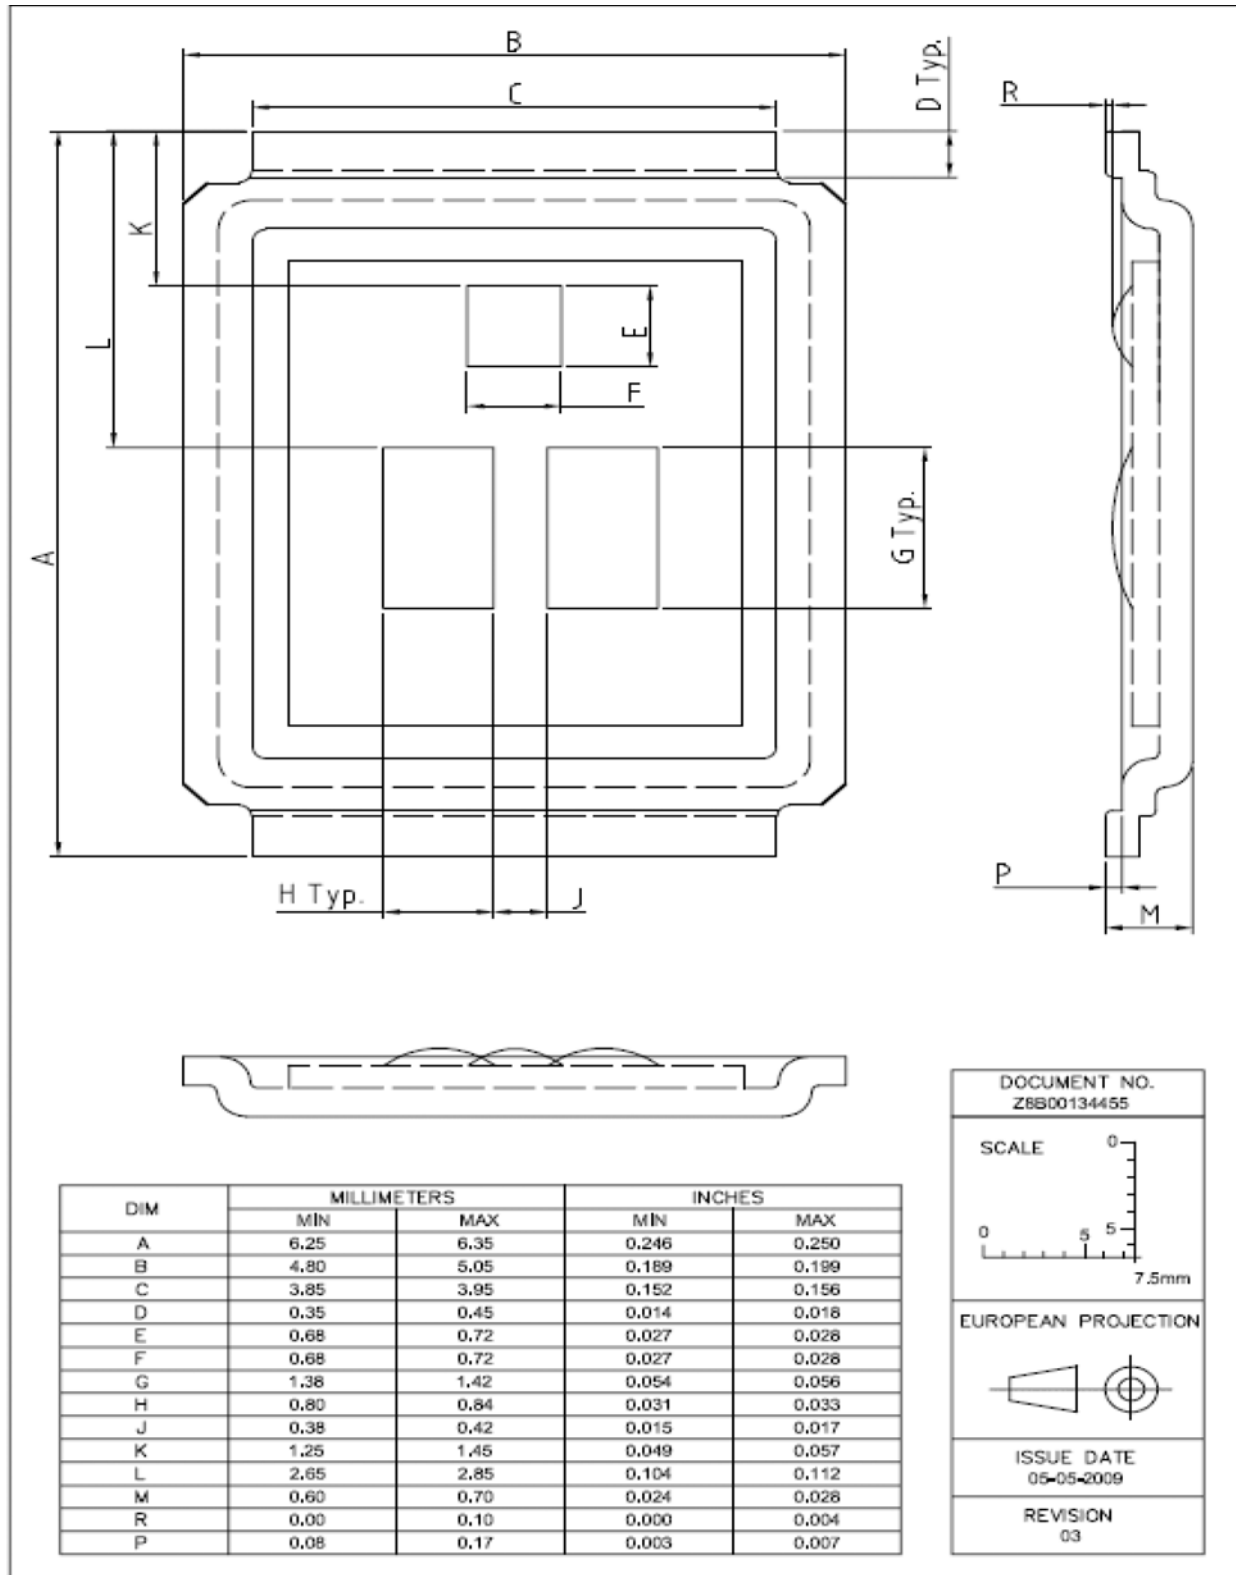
Outlines MG-WDSO-2, dimensions in mm/inches
